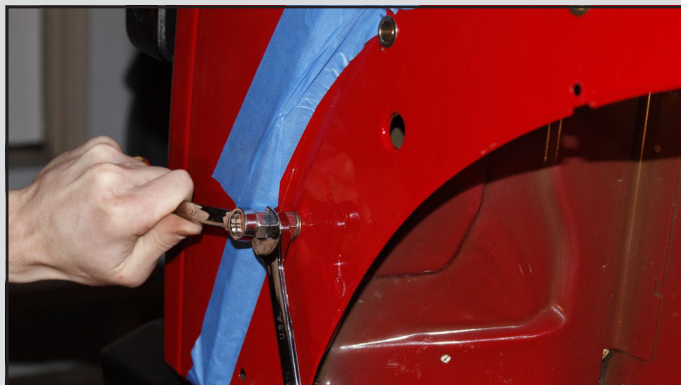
IMAGE MAY NOT MATCH THIS PART INSTALLATION. IT IS FOR ILLUSTRATION OF THE USE OF THE TOOL ONLY.
